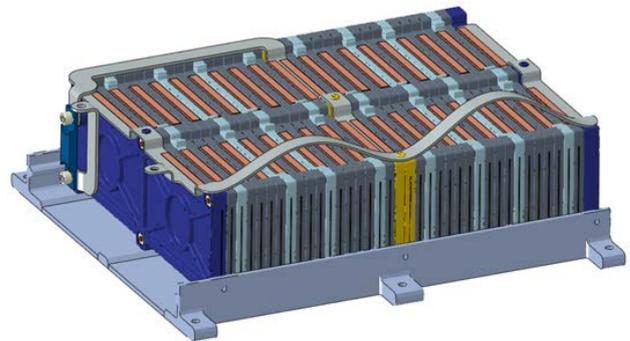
Sectional view through the early concept design showing the structure of the cell and frame assembly
